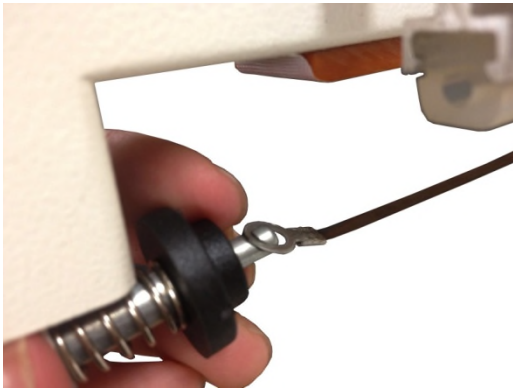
Attach other end of element to the spring hook assembly at the front of the sealing arm.
